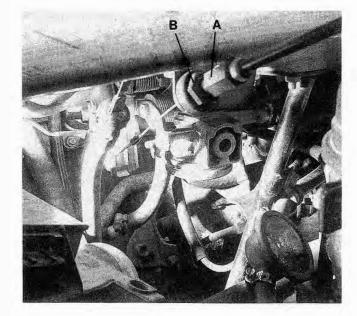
Accelerator cable adjusting nut (A) on 4-cylinder engines. To adjust, hold guide nut (B) and turn adjusting nut.
